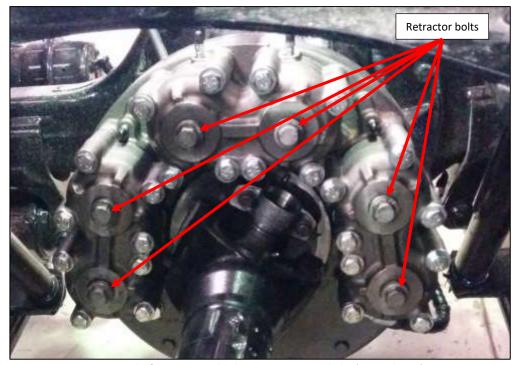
Failsafe Emergency brake piston retractor bolts (HV19 shown).
